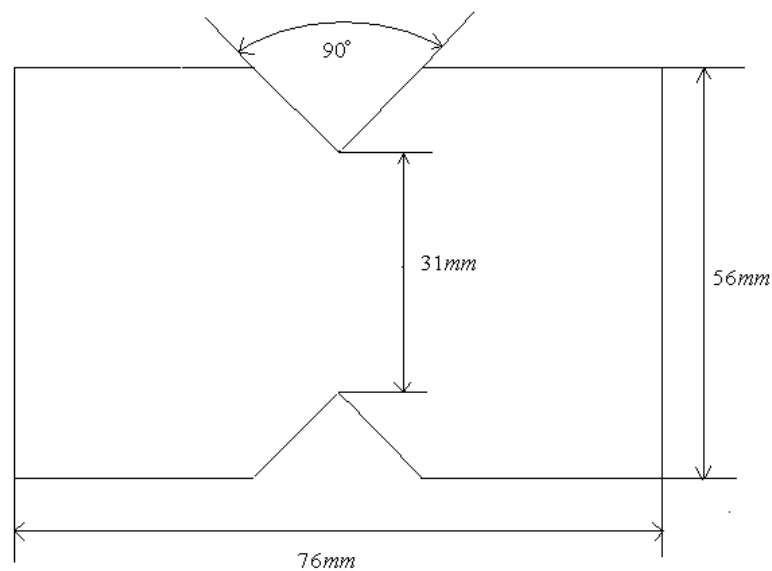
V notched rail shear method test specimen dimension and geometry
